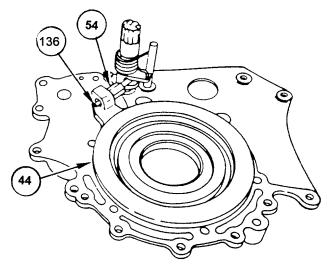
Right Brake Apply Cam. INSTALL RIGHT BRAKE SUPPORT ASSEMBLY, BRAKE APPLY CAM, AND BRAKE ADJUSTING LINKS – Cont.
